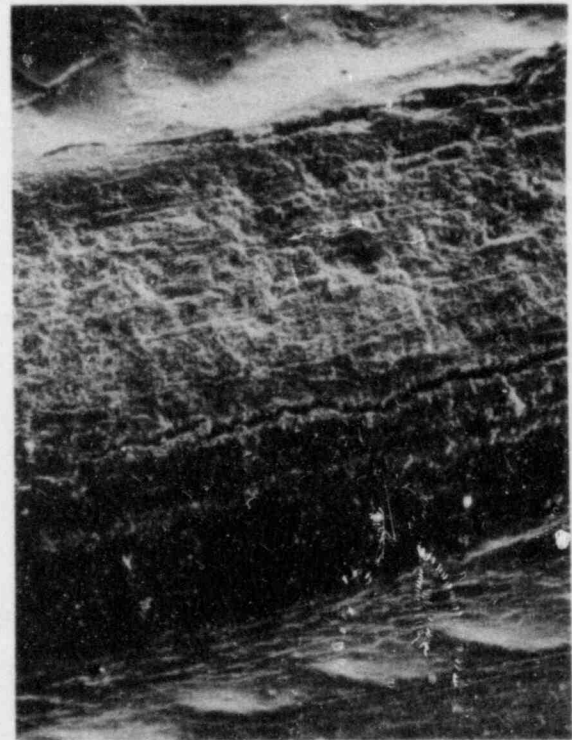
Cracks in sheath of Thermocouple TE-REB-E1 near a laser weld (200X).
